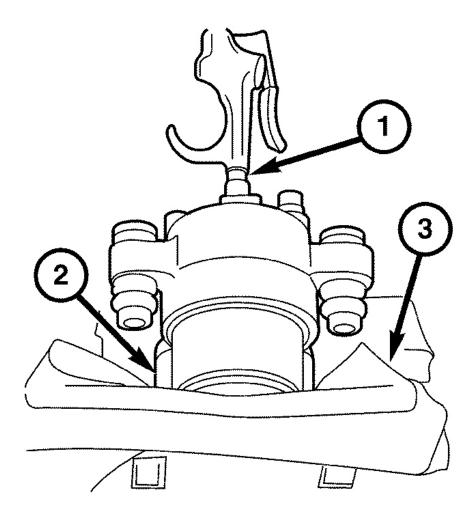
Padding Caliper Interior - Typical Courtesy of CHRYSLER LLC
